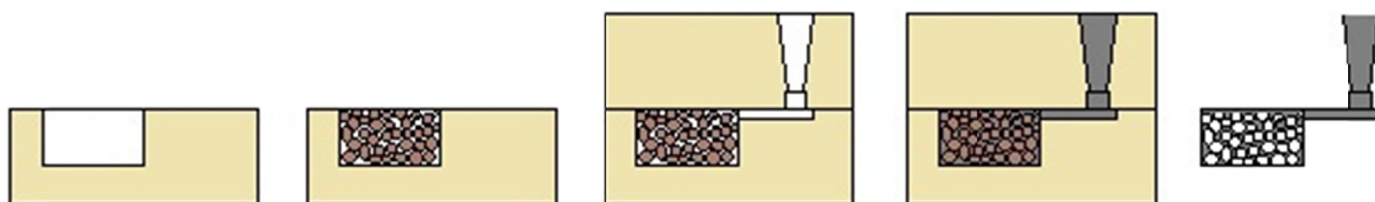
The principle of the liquid metal infiltration into the mould cavity filled with precursors, from the left: the mould, the mould cavity filled with precursors, the assembled mould, metal casting into the mould cavity, a metal foam casting after removal of precursors
